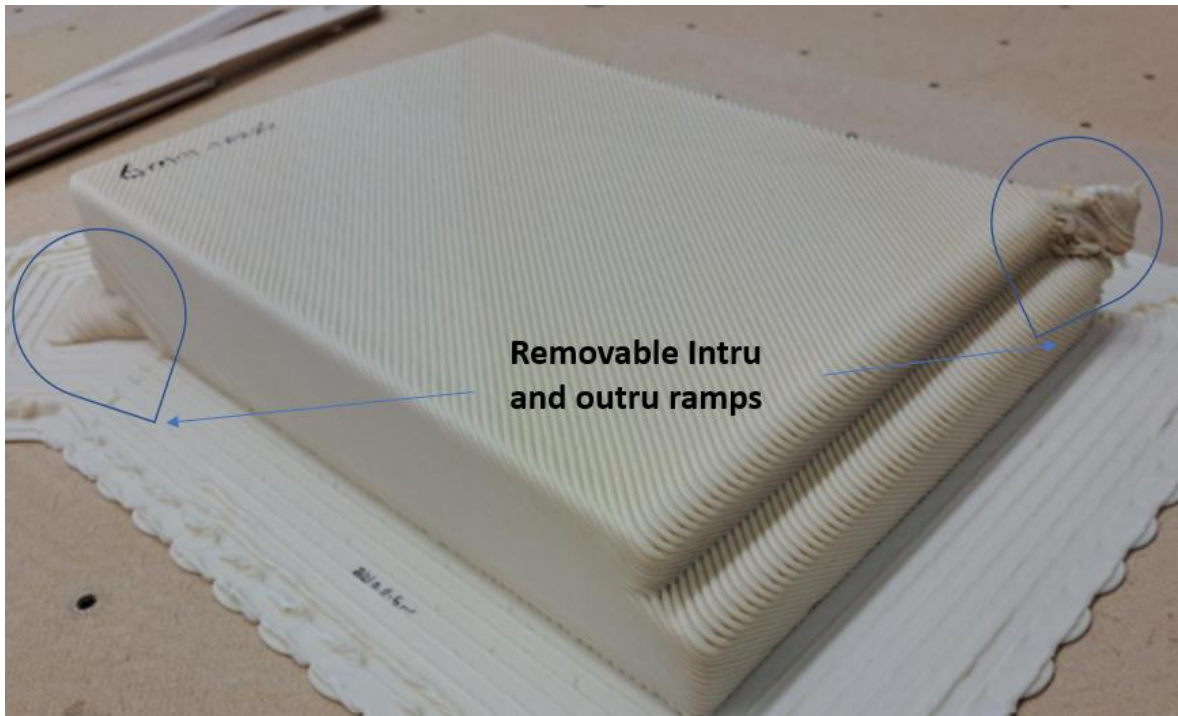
Example ramps for multi axis angled sliced print. These ramps will be mechanically removed in postprocessing
